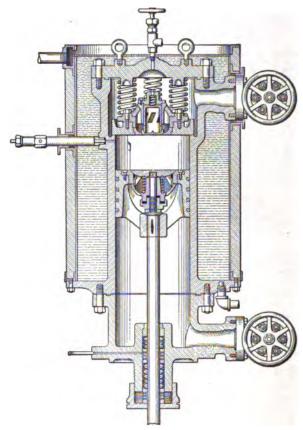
Single-Acting Compressor Cylinder, Valve in Piston.
